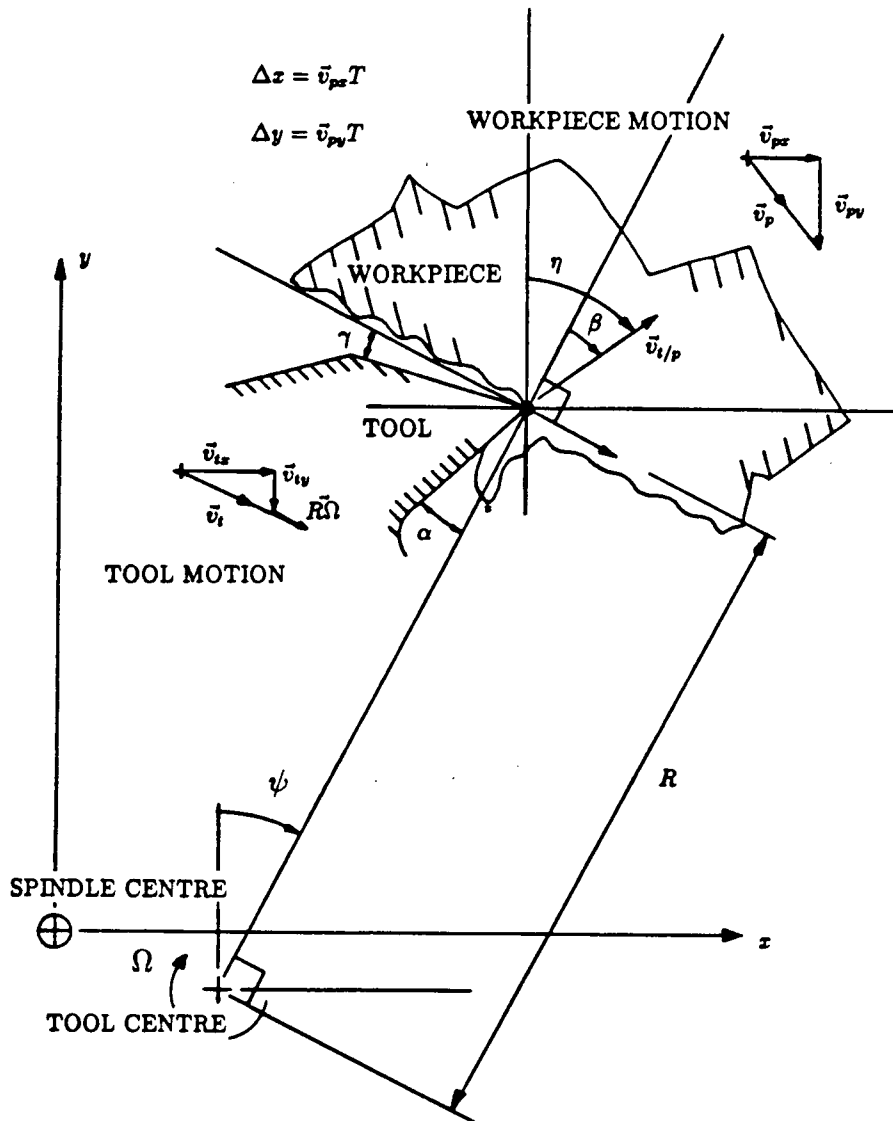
Geometry of the relative motion between the tool and the workpiece.
